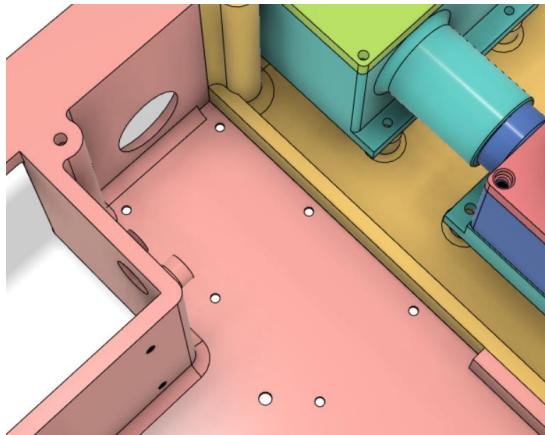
Before screwing down the Pressure Release Mechanism (PRM) with the Casing Base 11
